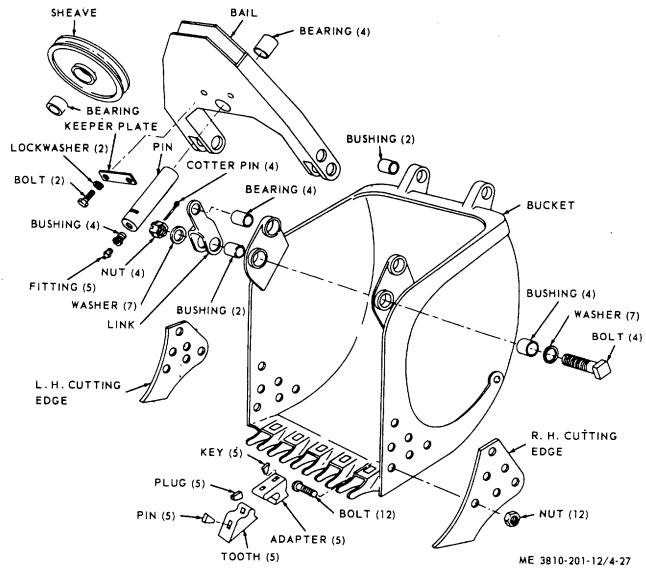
Backhoe bucket, disassembly and reassembly.
